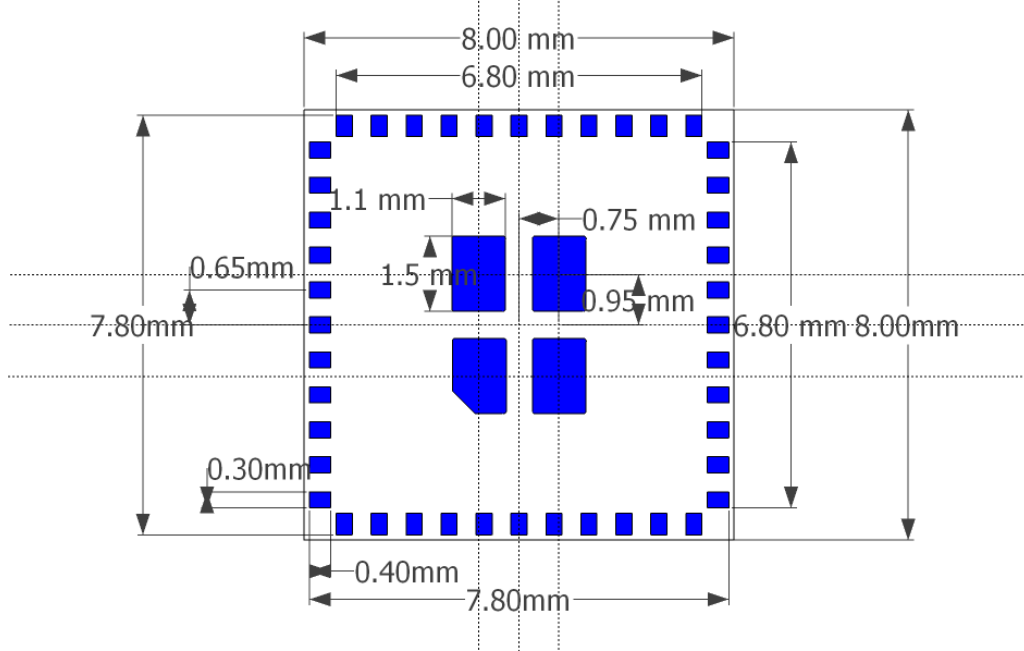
HDG204 Pad pattern, top view, units in mm
